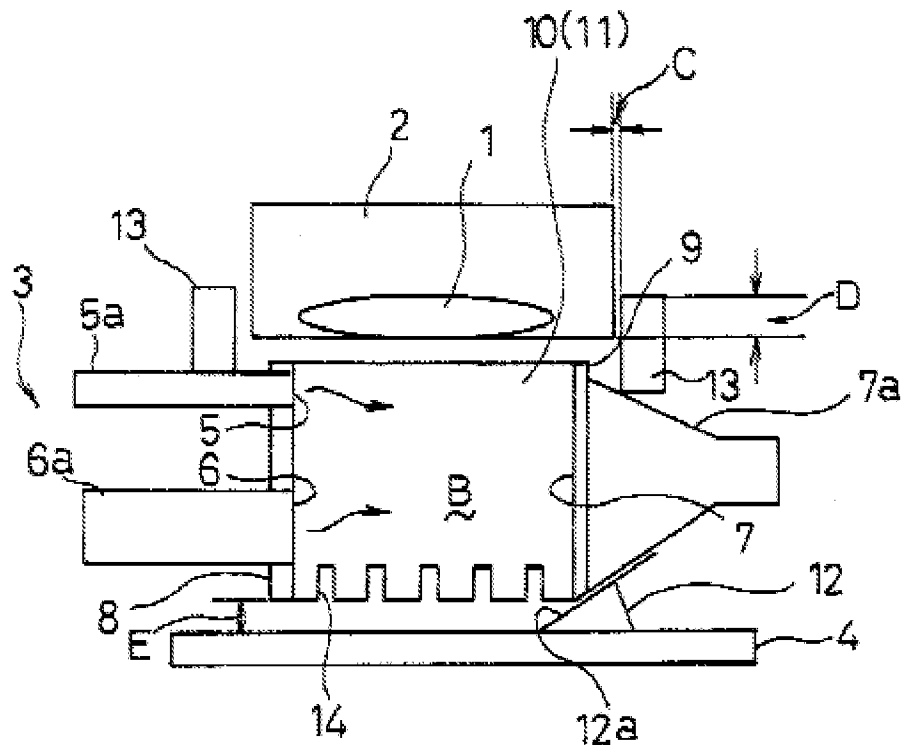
is a schematic cross-sectional view showing a dust collector for a laser drilling machine. Otsubo et al. (USPN 6,507,000) Laser Drilling Machine and Method for Collecting Dust.
